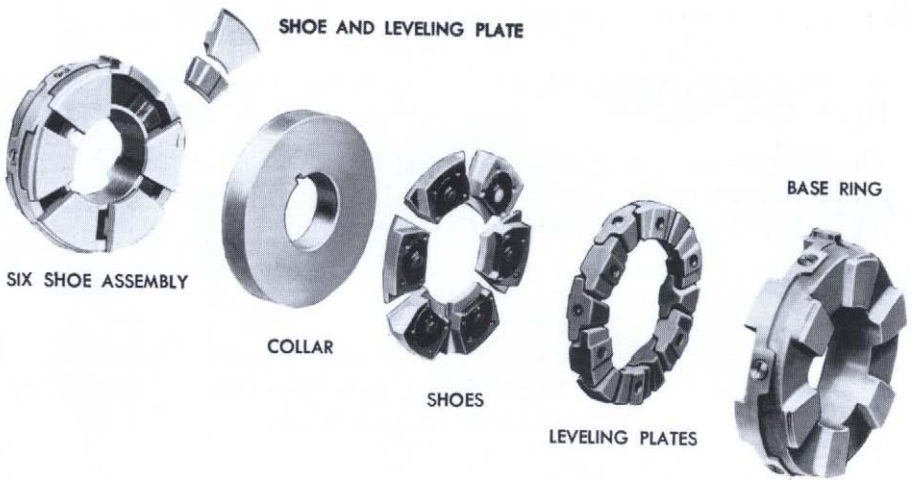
Small Kingsbury six-shoe, two direction thrust bearing. Left-hand group assembled, except for one shoe and 'upper' leveling plate. Right-hand group disassembled (Courtesy of Kingsbury, Inc.)
